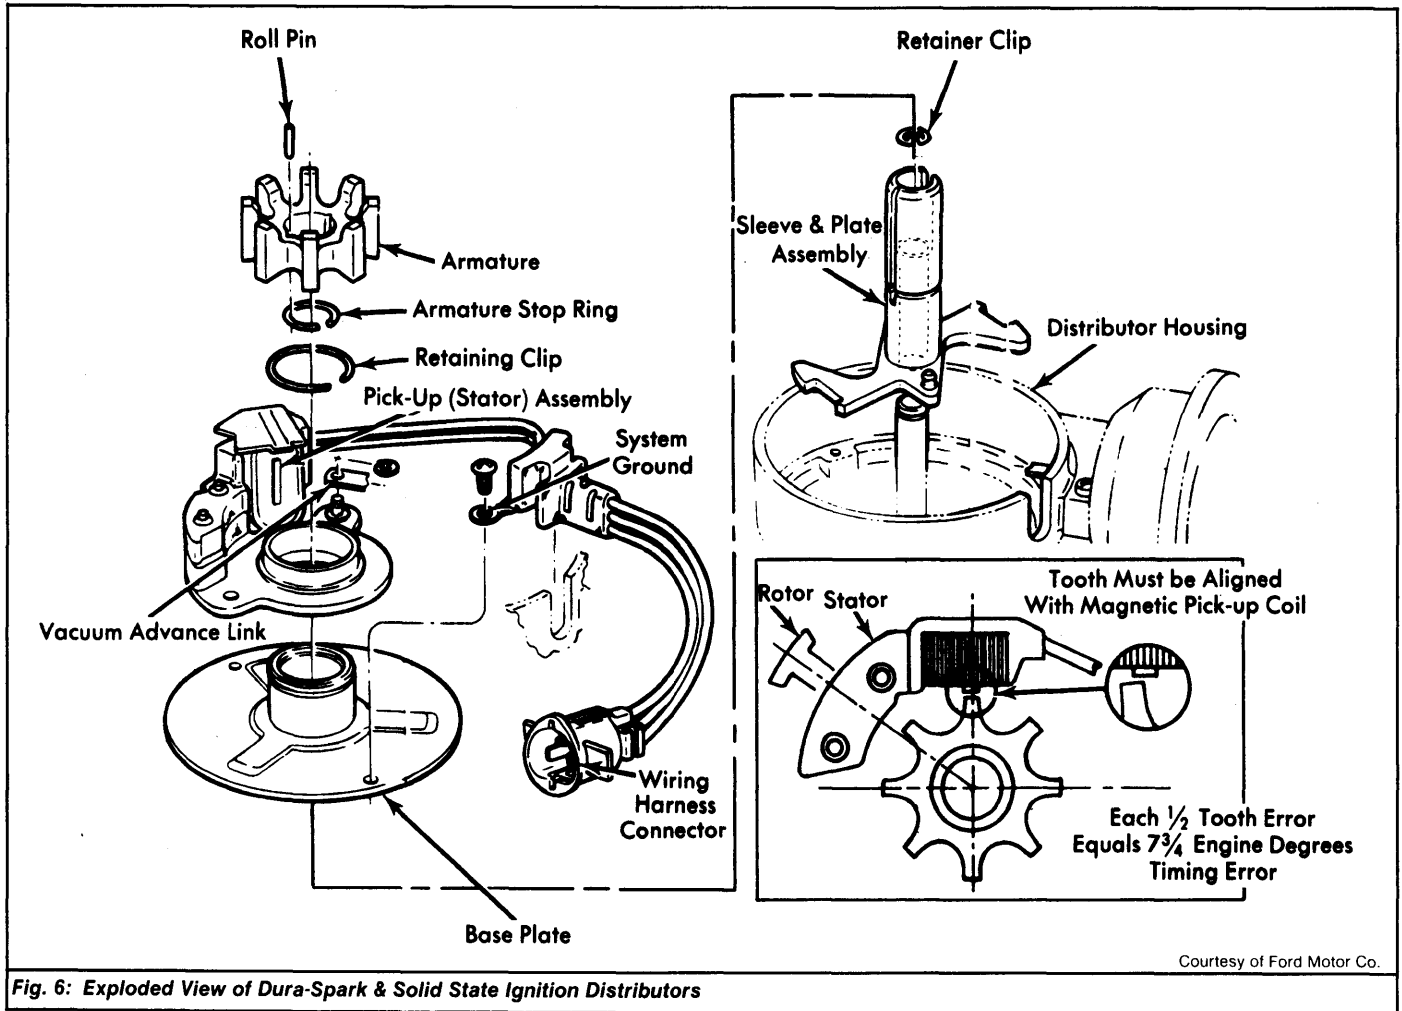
Exploded View of Dura-Spark & Solid State Ignition Distributors
